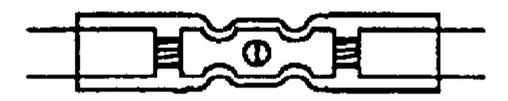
Proper Crimping Of Solderless Connector Courtesy of GENERAL MOTORS CORP.
